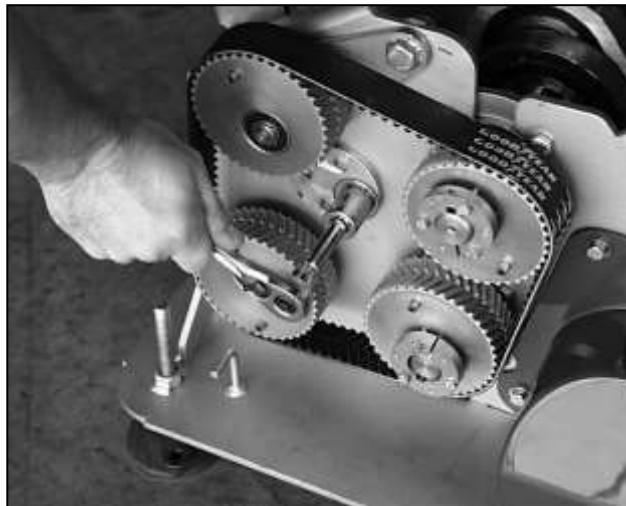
Loosening the Tensioner Cam Pivot Bolt
